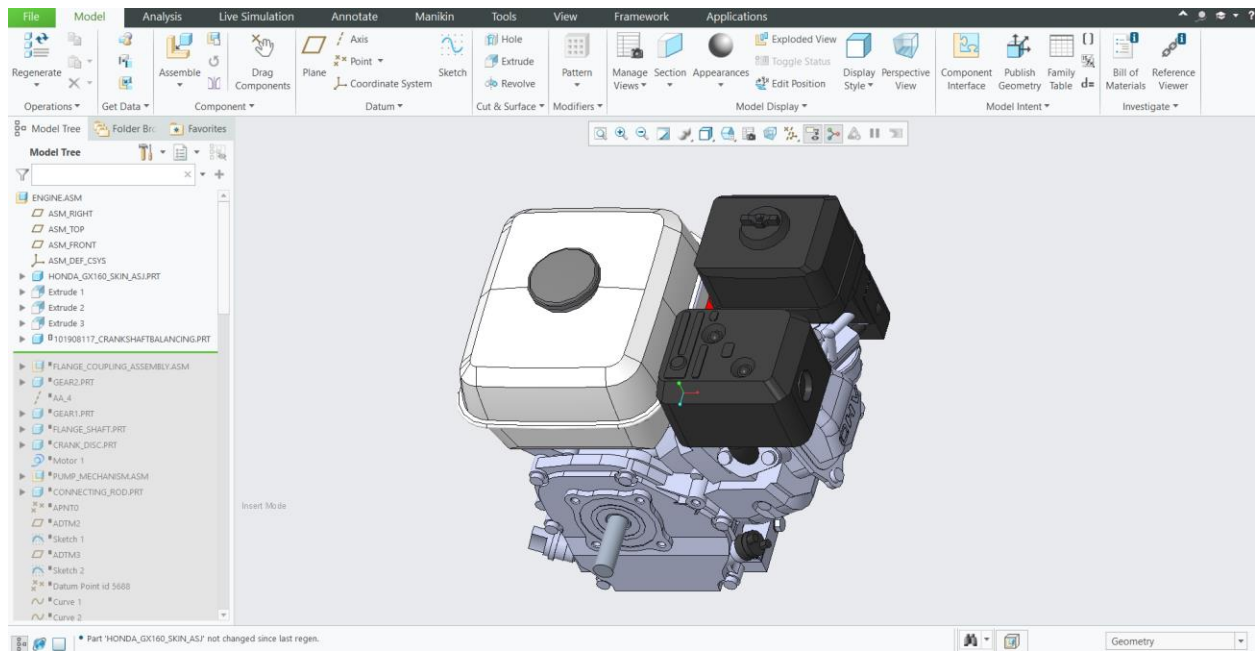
Exporting feed pump assembly from ONSHAPE)
